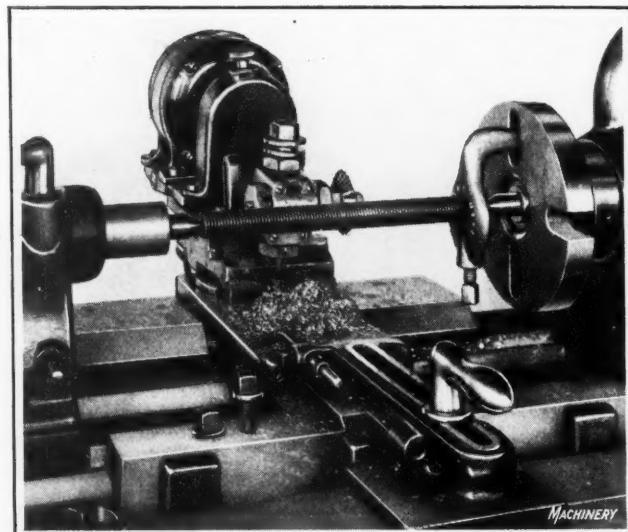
Thread Milling and Grinding Machine produced by the Automatic Machinery & Equipment Co.
